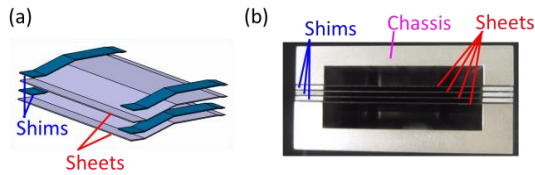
(a) Exploded drawing of chevron beam dump, (b) photograph of its prototype
